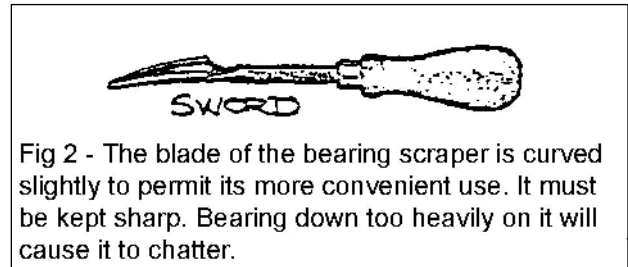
The blade of the bearing scraper is curved slightly to permit its more convenient use. It must be kept sharp. Bearing down too heavily on it will cause it to chatter.
